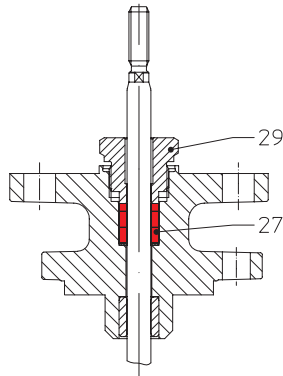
; Nominal diameter DN100; Nominal pressure PN40; Body material 1.0619+N; Isolation plug; Stem sealing PTFE-V-ring unit; ARI-PREMIO 12kN
